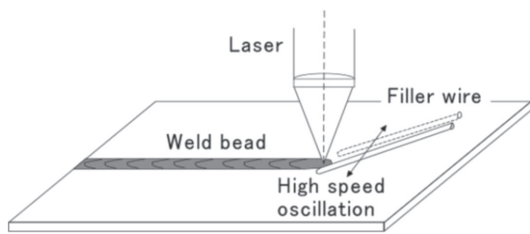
Schematic illustration of filler wire oscillation laser welding
